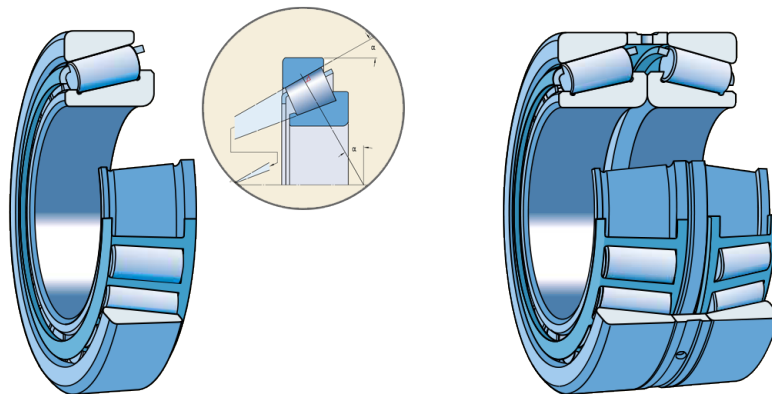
A tapered roller bearing (one row) with a detail of its contact angle, on the left, and a two-row tapered roller bearing on the right [3].
